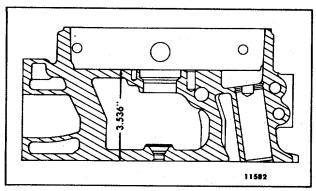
Minimum Distance Between Top and Bottom Faces of Cylinder Head
